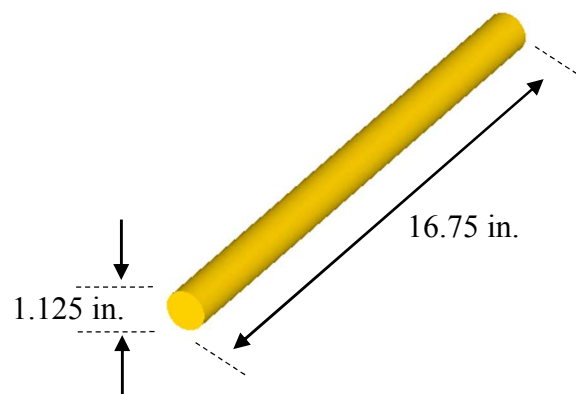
Starting billet dimensions of the existing wrench forging process
